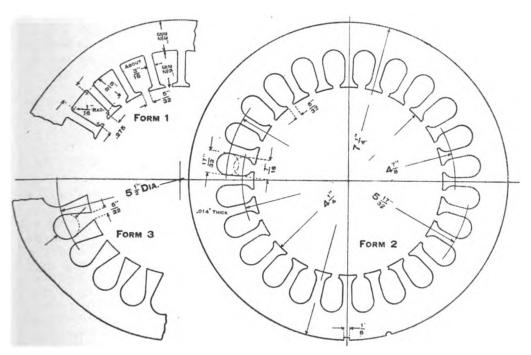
SHEET IRON FOR STATOR OF MOTOR SHOWING SEVERAL PRACTICAL FORMS OF SLOTS
